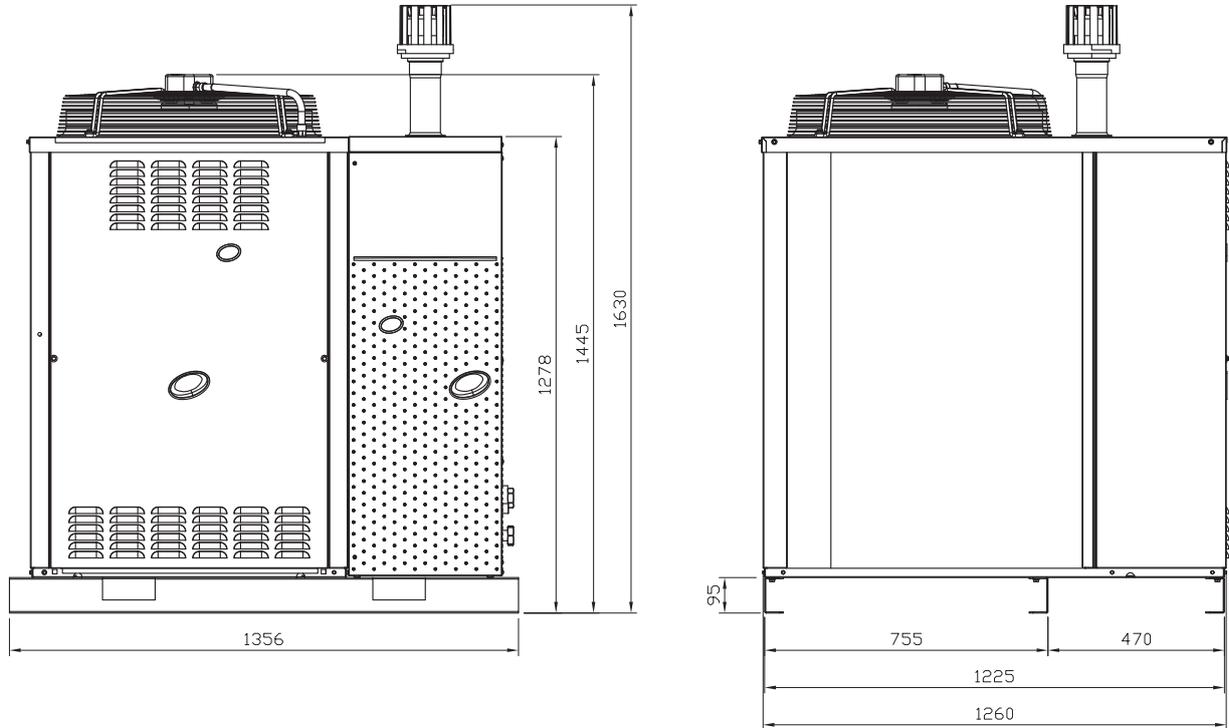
Dimensions (Silenced ventilation) - Front and side view (dimensions in mm)
